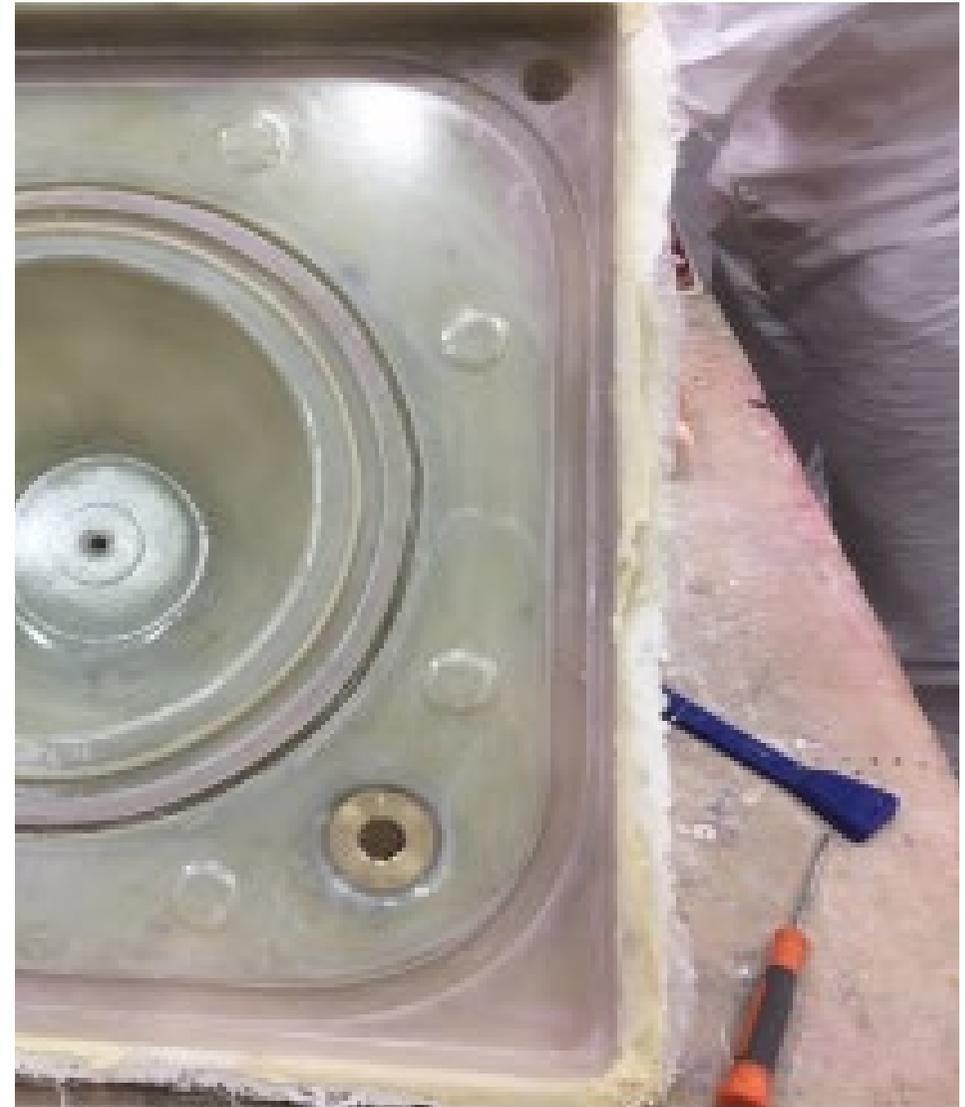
Shows the released counter mould that has had the wax cleaned up. The vacuum clamp pressure port, resin inlet port and resin outlet port can clearly be defined.
